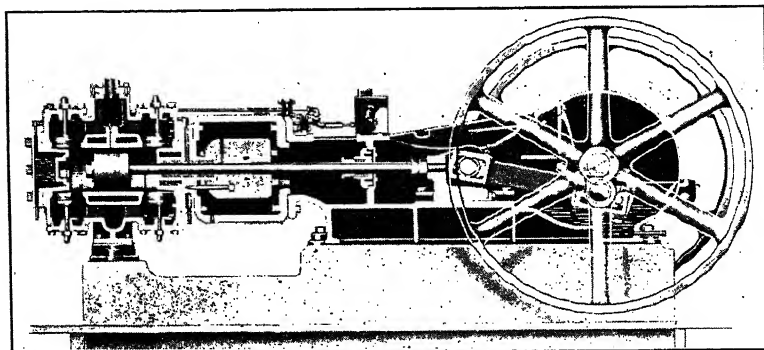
Cross-section of ammonia compressor with stuffing boxes, as shown in FIG. 62, making an enclosed crank-case for lubrication.
